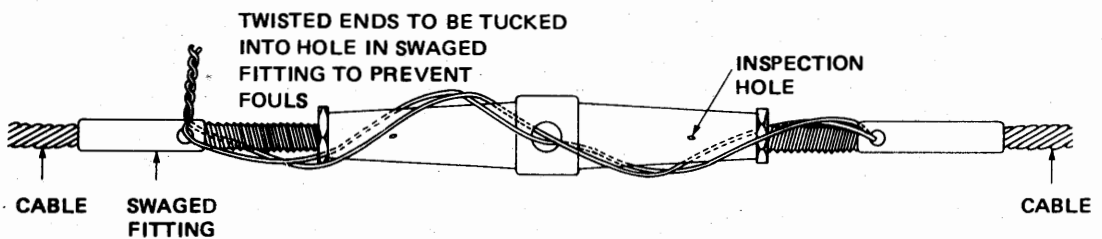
WIRE-LOCKING OF TURNBUCKLE WITH SWAGED END-FITTINGS
